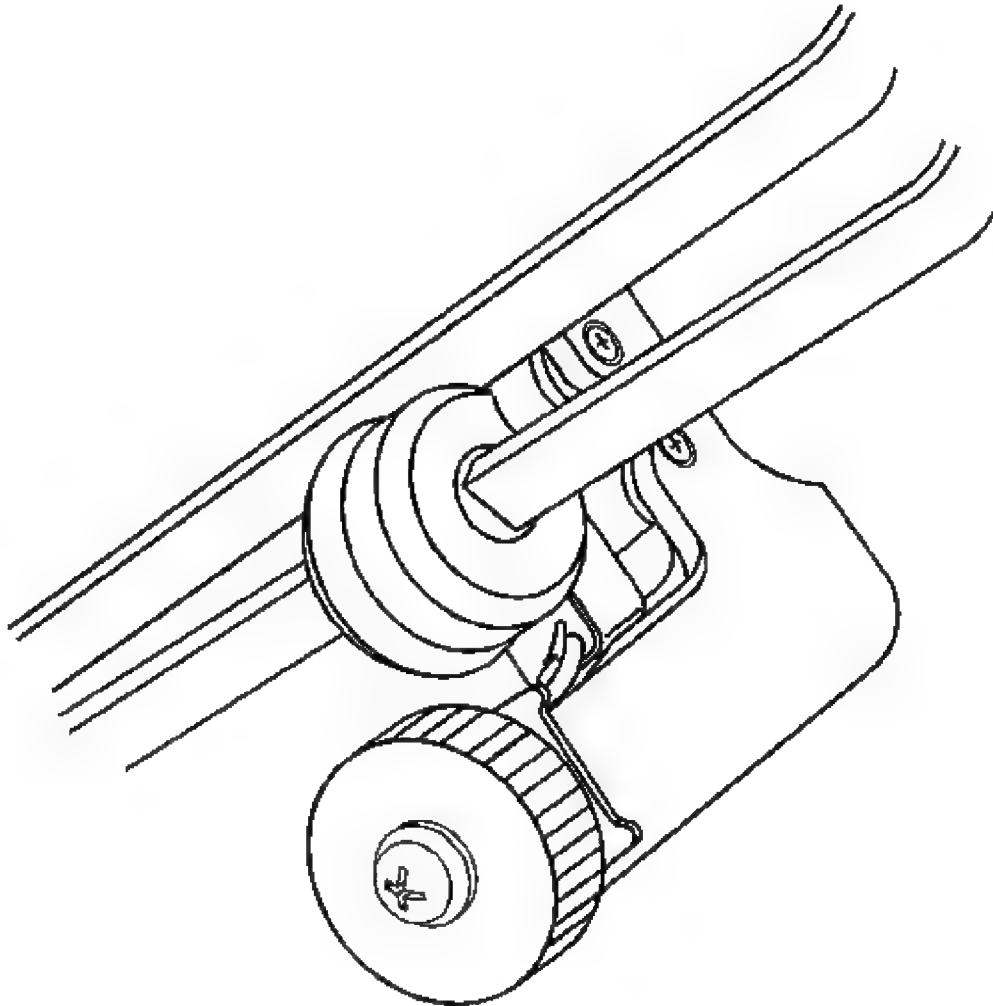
Sectioning Brake Pipe Using Pipe Cutter
